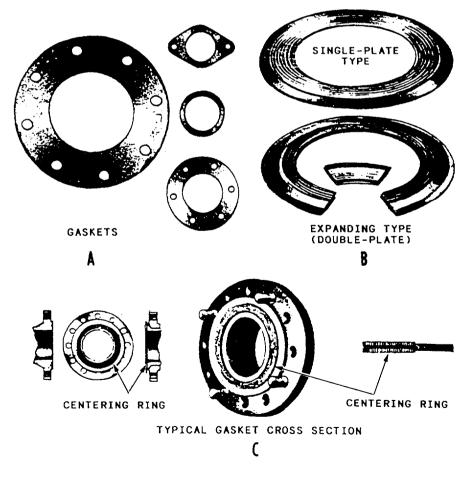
Fixed-joint gaskets. A. Sheet asbestos gaskets. B. Serrated-face metal gaskets. C. Spiral-wound, metallic-asbestos gaskets.
